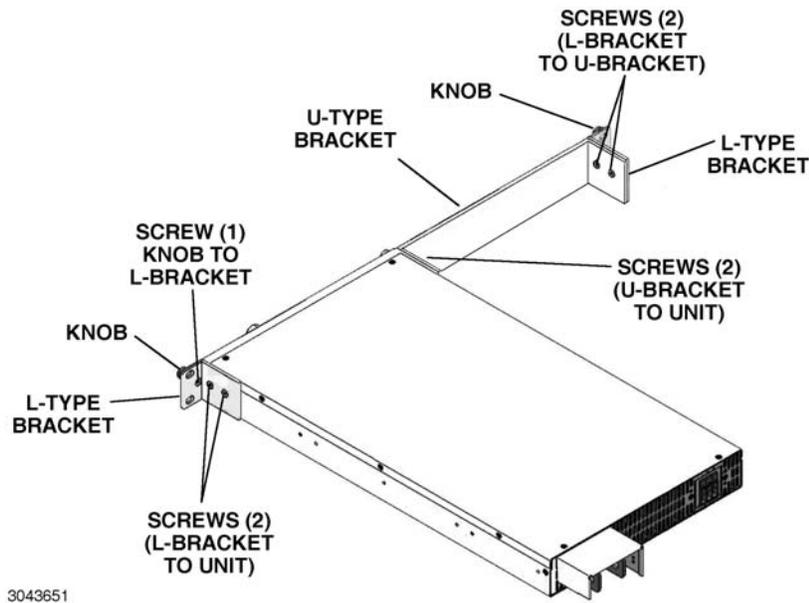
MOUNTING ONE KLN 750W UNIT IN 19-INCH RACK
